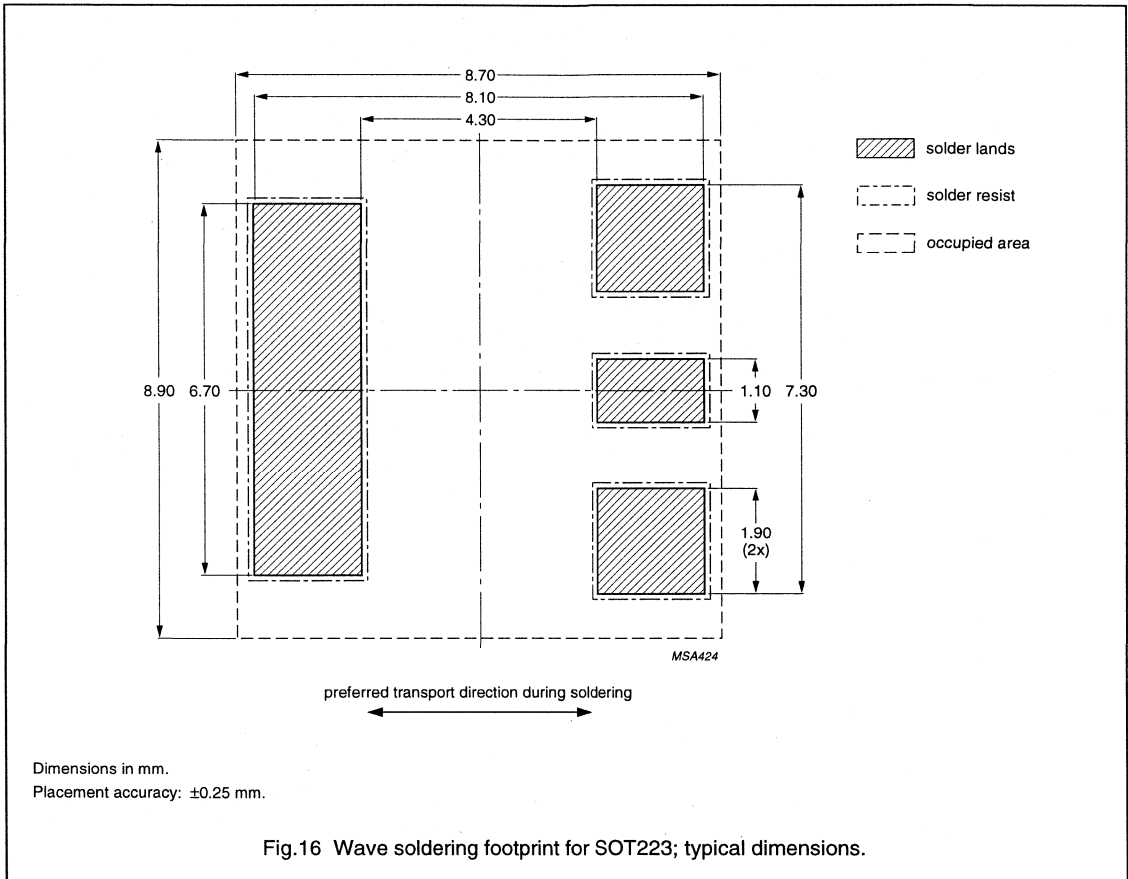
Wave soldering footprint for SOT223; typical dimensions.
